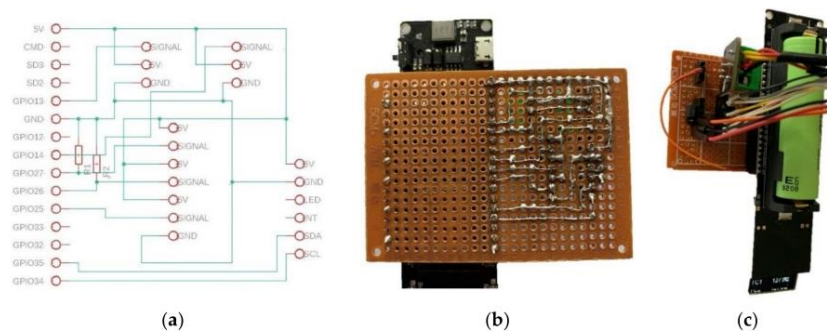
Schematic design of the electronic board for the sensors (a), soldering process (b) and electronic assembly (c).
